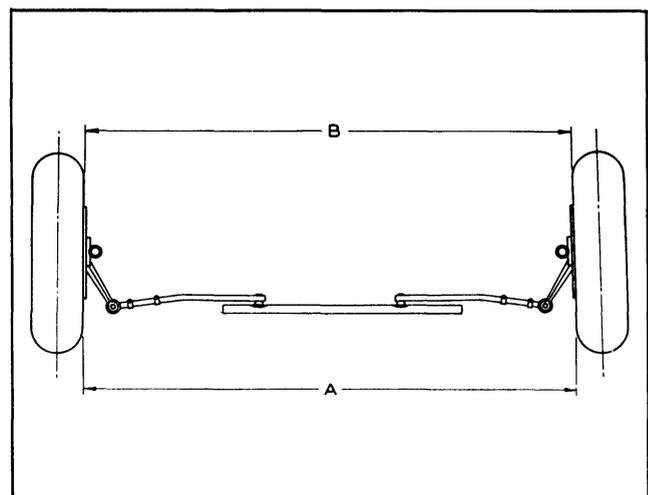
Front Wheel Toe-In (A Minus B)
